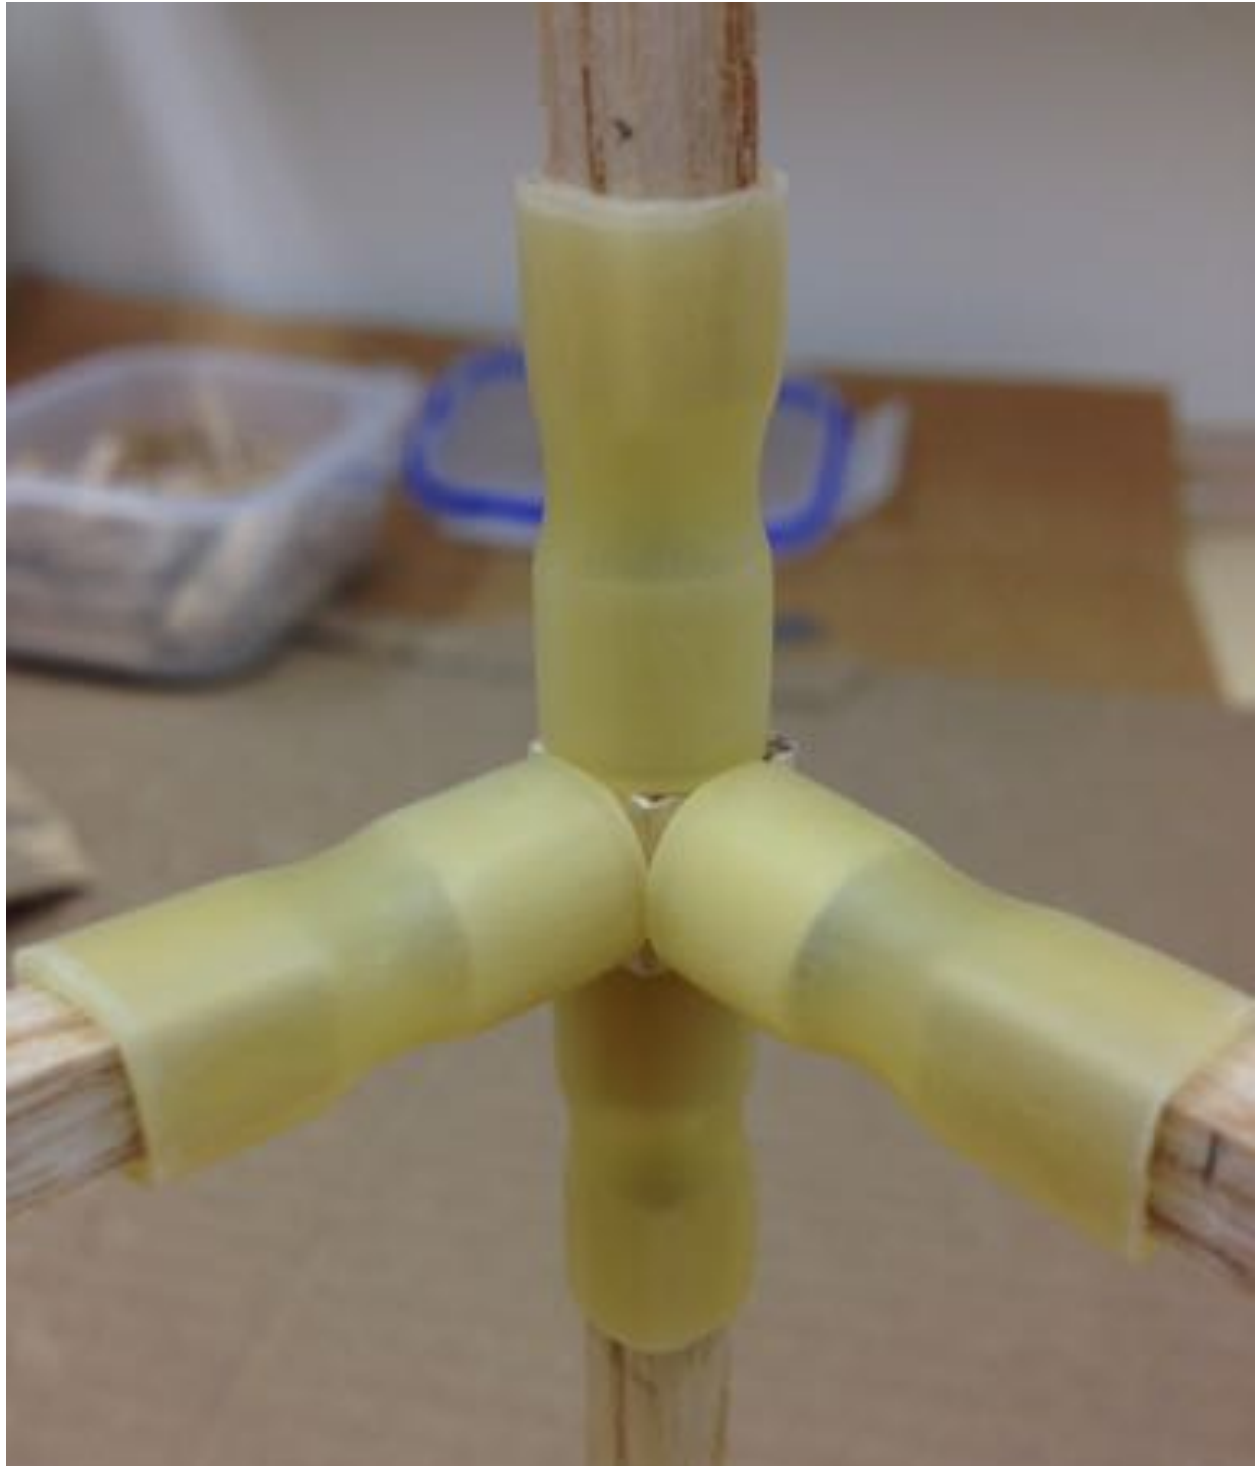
Fully assembled 4-corner piece (type B from Figure 3).
